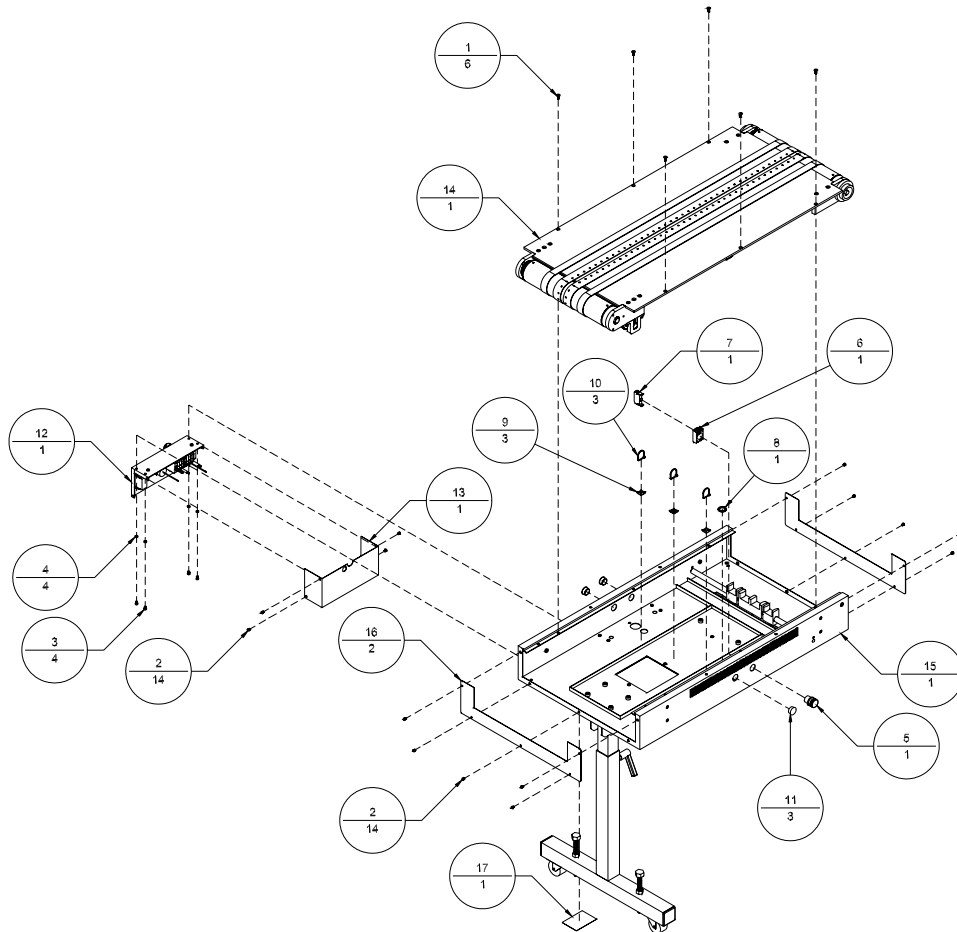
Vacuum Extension Table – Left (BK703L)
